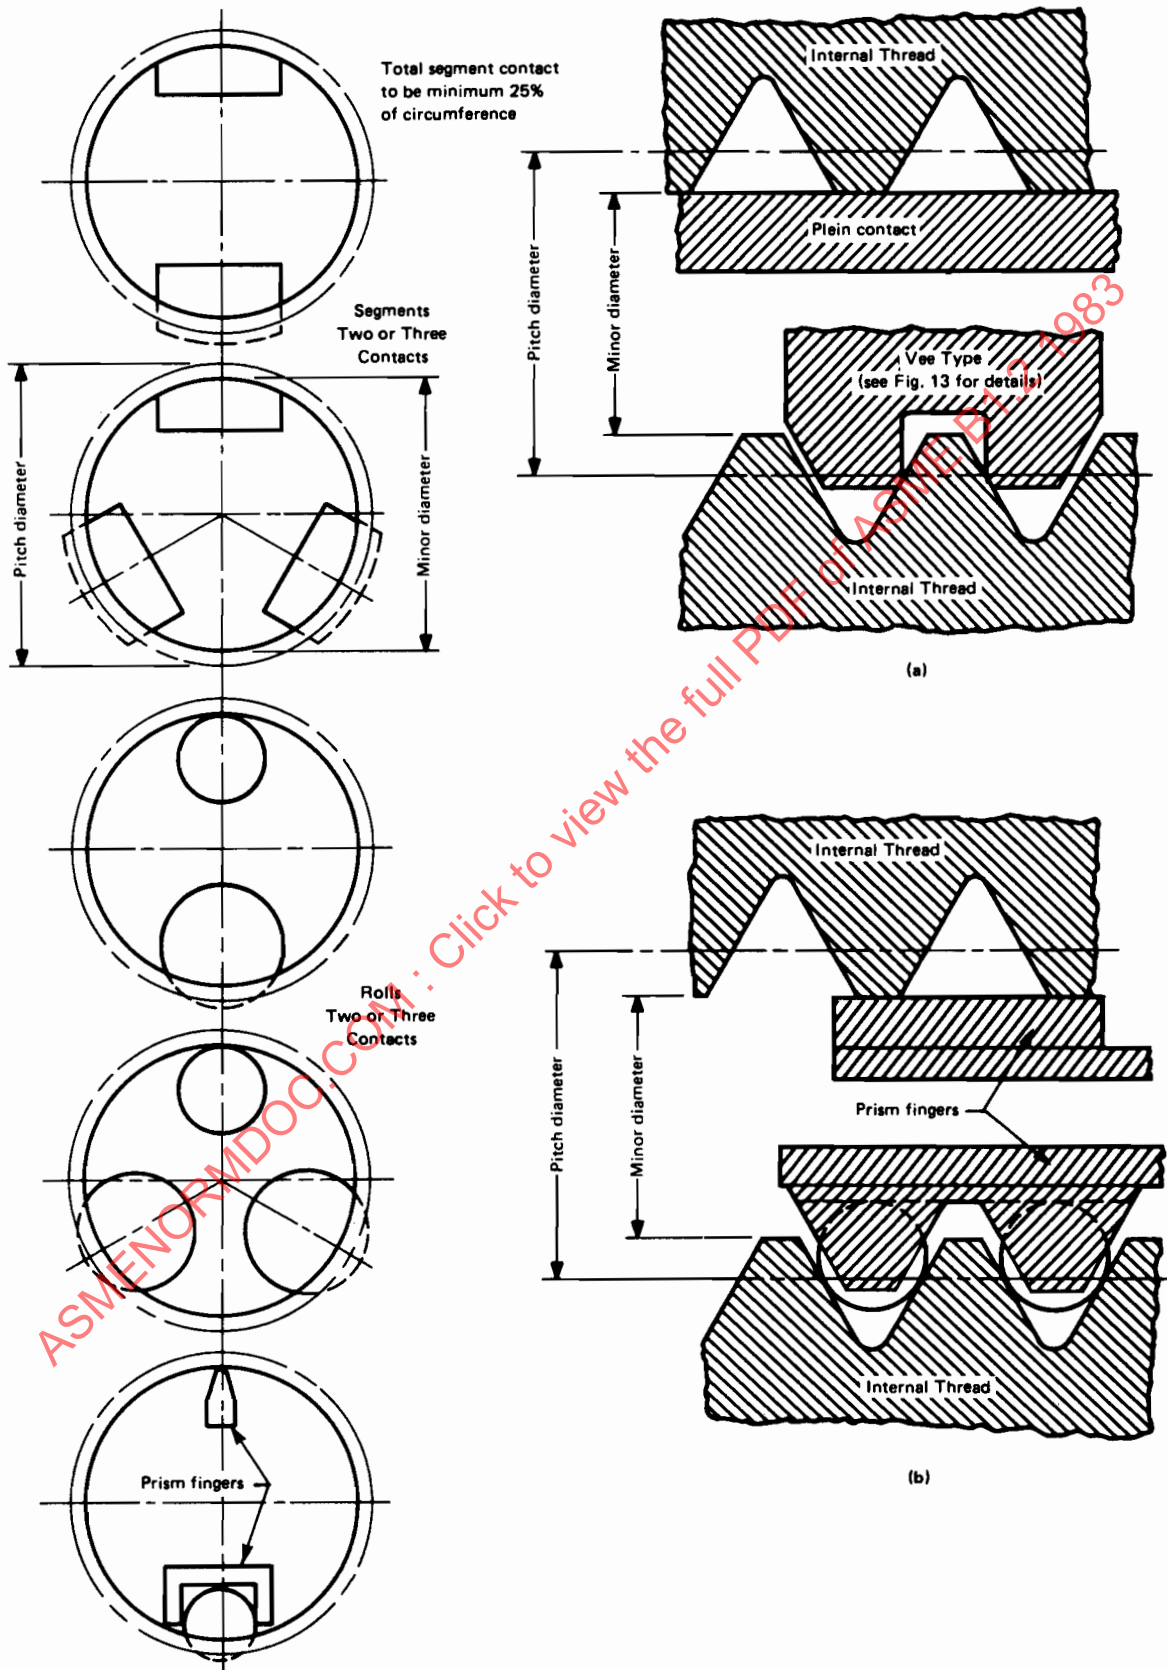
INDICATING THREAD GAGES — DIAMETER RUNOUT — MINOR TO PITCH
